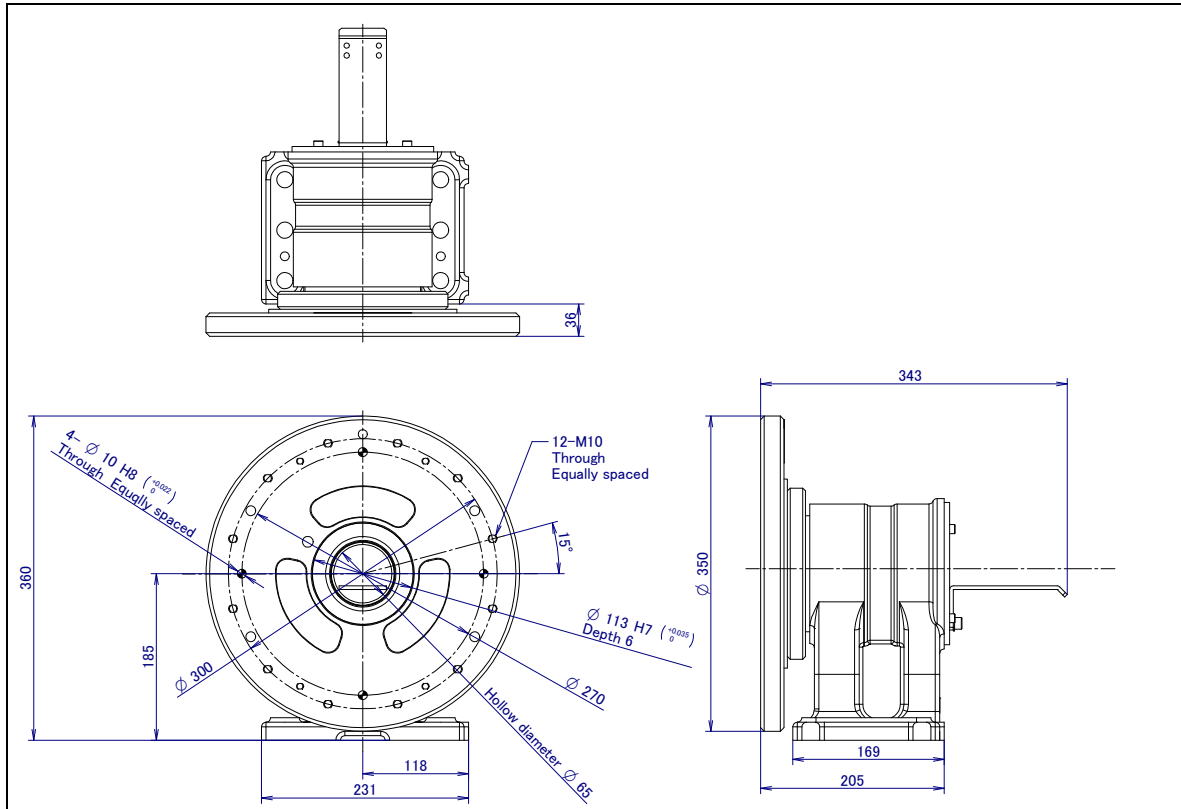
(d) Outline of follower unit (insulated flange) (option)
